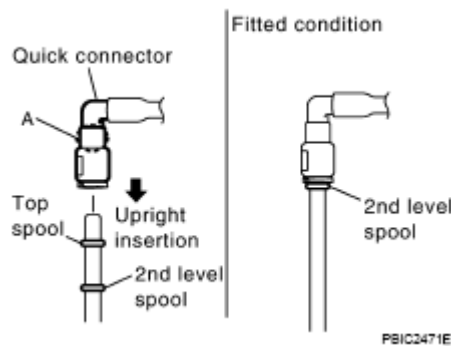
Inserting Quick Connector To Centralized Under-Floor Piping
